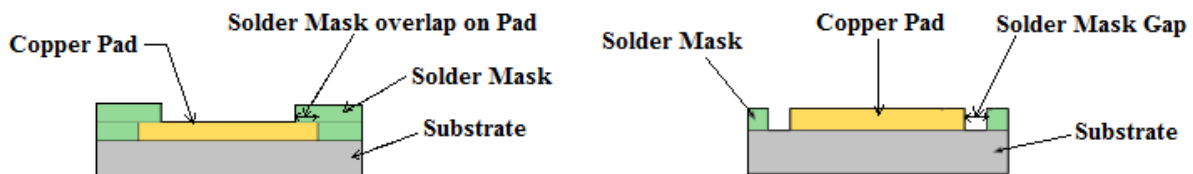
Cross-section view of a) Solder Mask Defined (left), b) Non-Solder Mask Defined (right)
